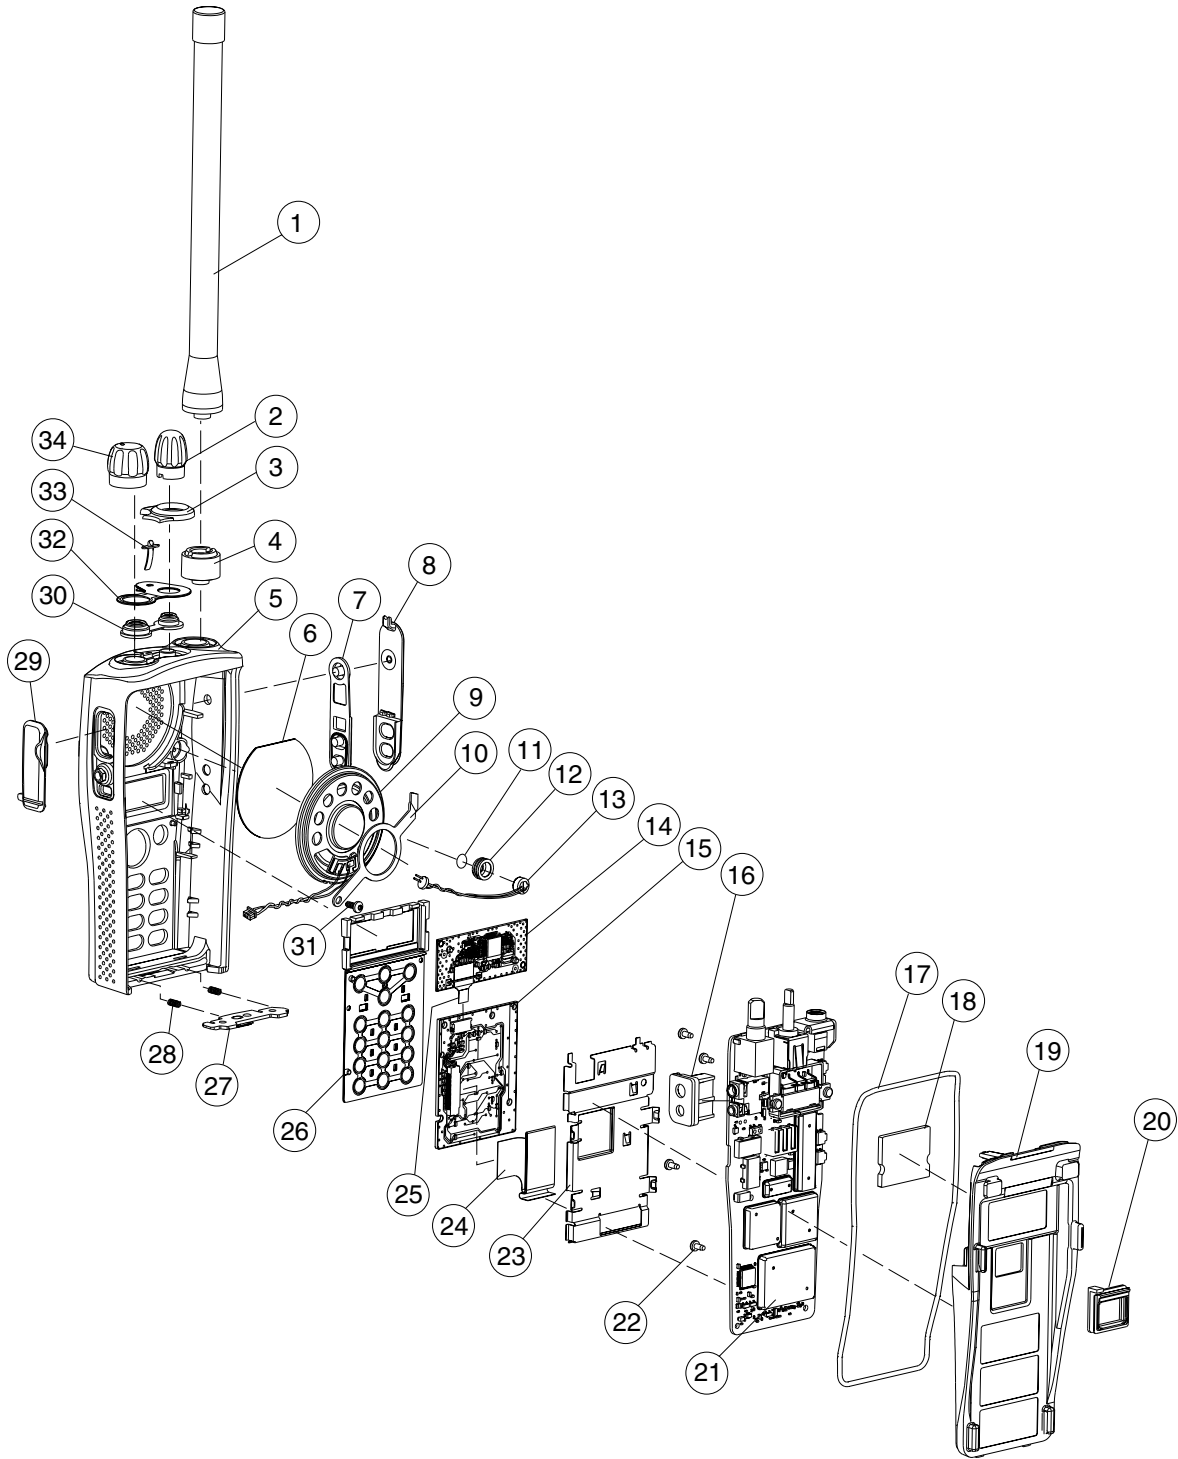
CP160 Limited Keypad Radio Exploded View
